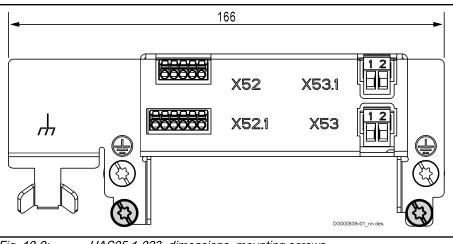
HAS05.1-023, dimensions, mounting screws
